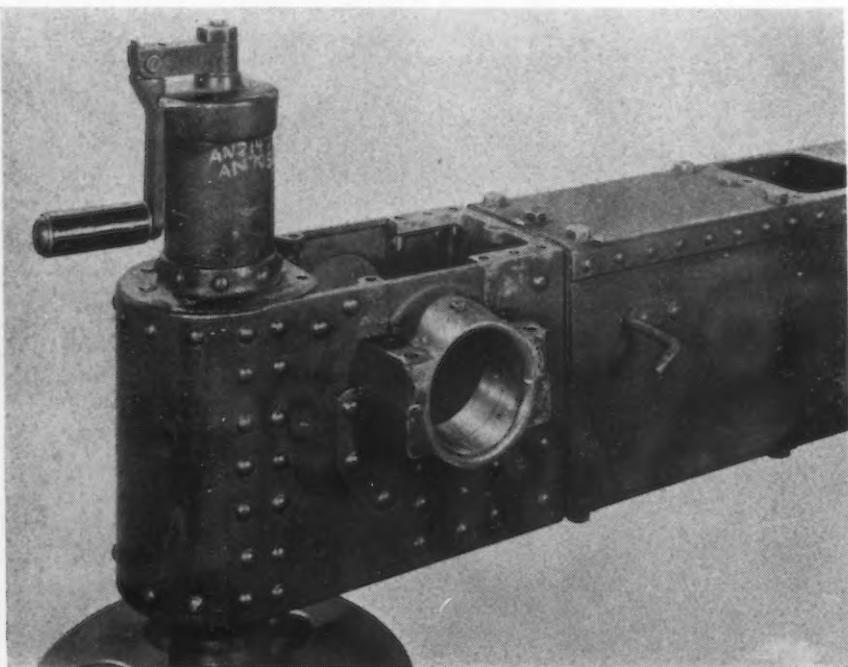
is a view of the riveted construction used in the foreign model, while Fig. 3 illustrates the corresponding welded construction now being used for the carriage chassis. The welding methods used in attaching brackets, stake supports, outrigger locks and other parts to the chassis frame should be compared with the procedure employed in fastening corresponding parts on the foreign model. Figs. 4 and 5 contrast the designs employed in forming the bottom section of the drum or central section. The foreign design does not completely cover the bottom of the tub, because of the necessity for getting on the inside to rivet. It will be noted that a double plate is required to secure the needed strength. The welded design consists of a single plate which completely covers the tub bottom, thus adding needed strength without the necessity of having an additional plate.
